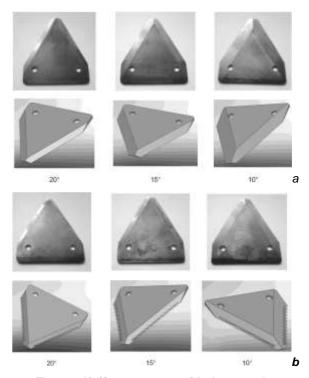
Knifes geometry with three angle. a-smooth cutting edges ; b- serrated cutting edges
